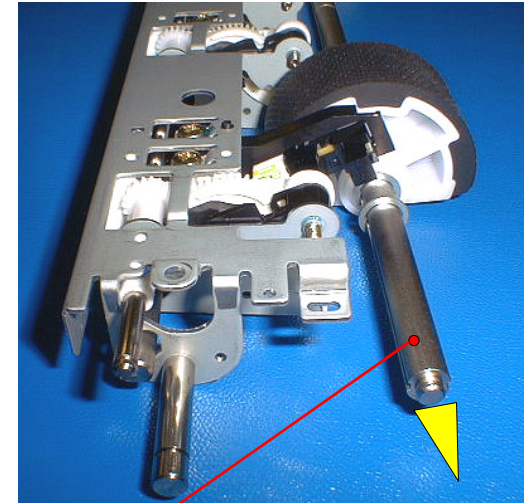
"Lever, Roller, Paper Feed, Right" Removal
